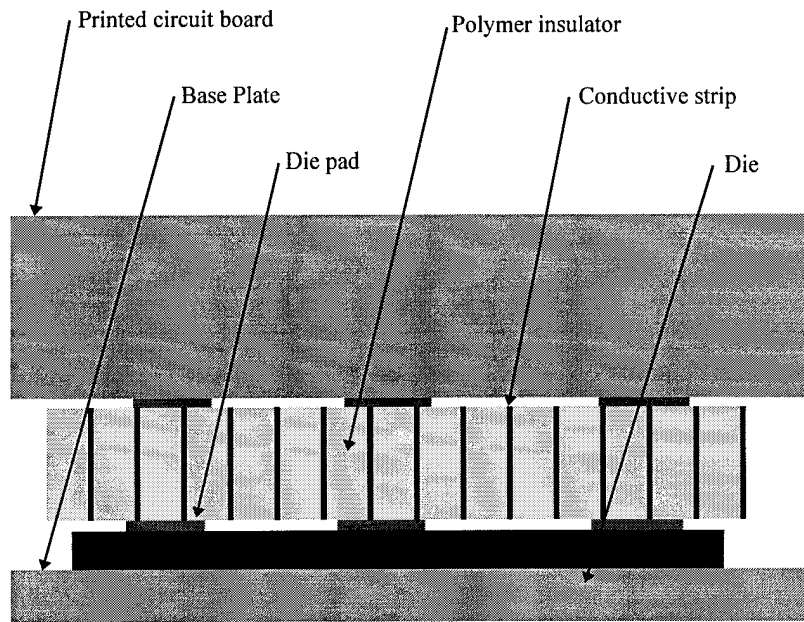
Compressive wiring connecting a die to a printed circuit board. The die is clamped between a base plate and the circuit board, trapping the polymer wiring array.
